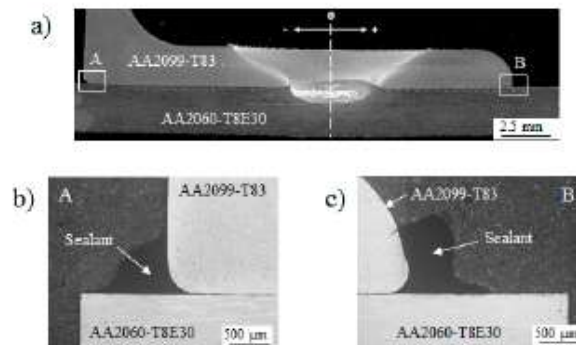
(a) Cross-sectional macrograph of the FSW weld in coupon C4; (b) magnified image of detail A in Figure 6a; and (c) magnified image of detail B in Figure 6a.
